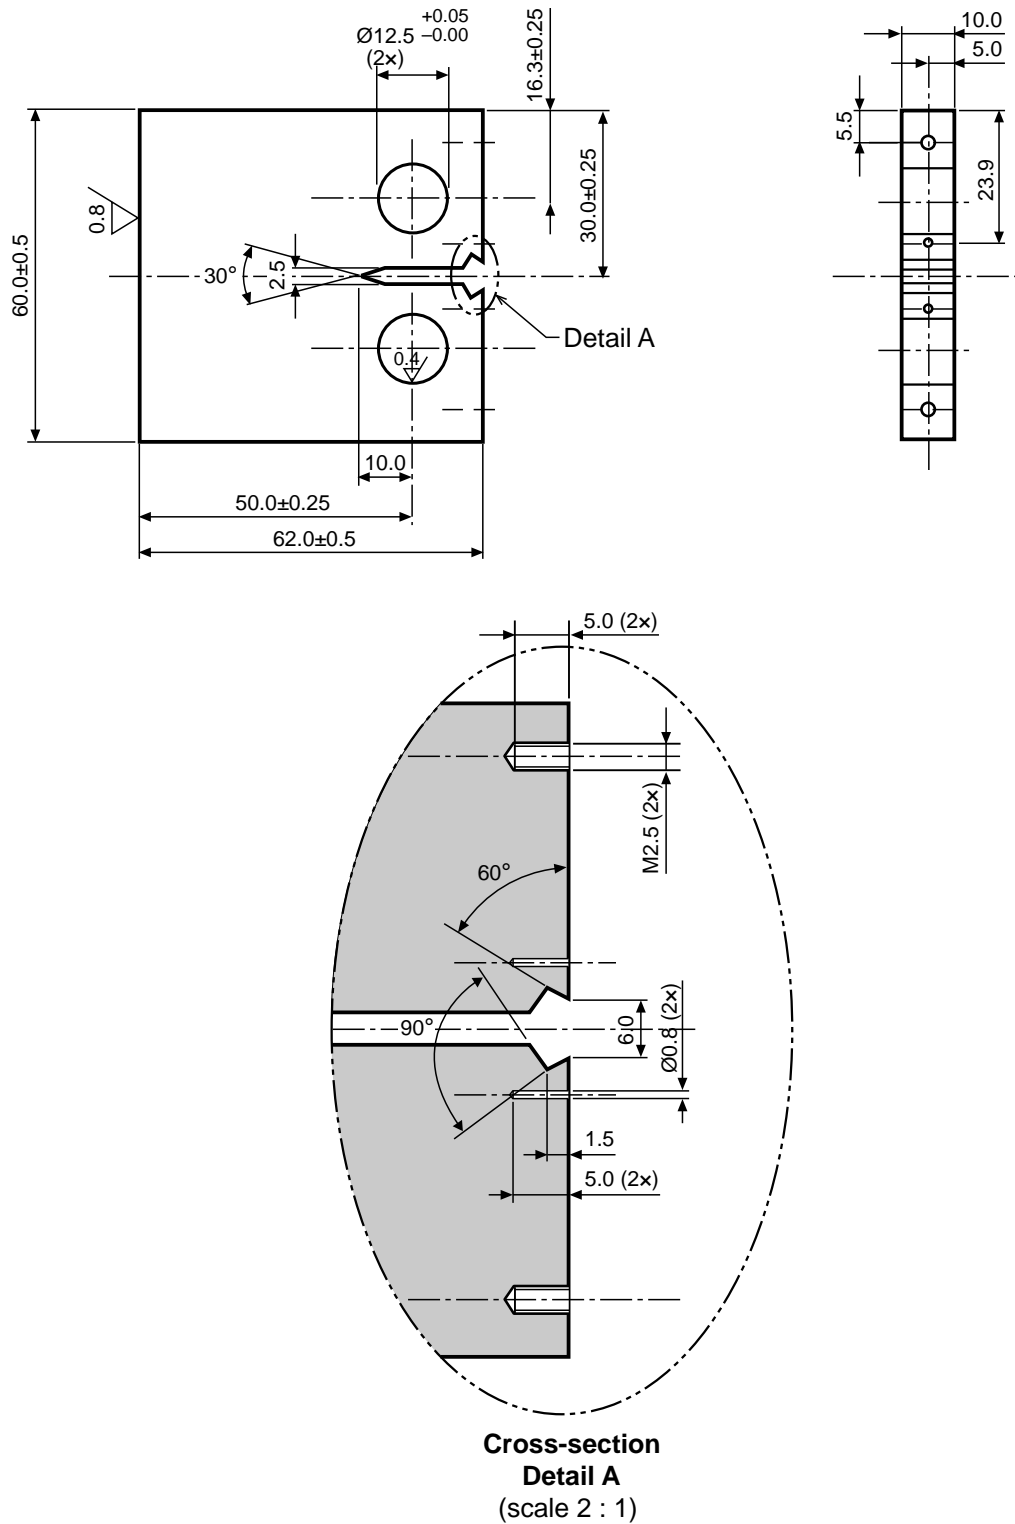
Compact Tension (CT) specimen dimensions (mm). Detail A shows the locations of the leads for the DC. potential drop measurement system and the integrally machined knife edges for clip gauge measurements of crack opening displacements
